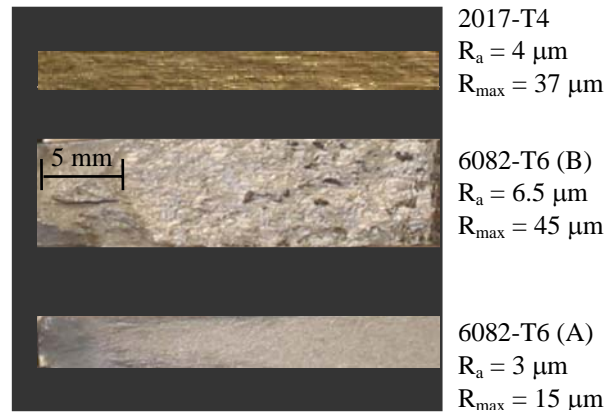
Images of specimens fatigued fracture surfaces.
